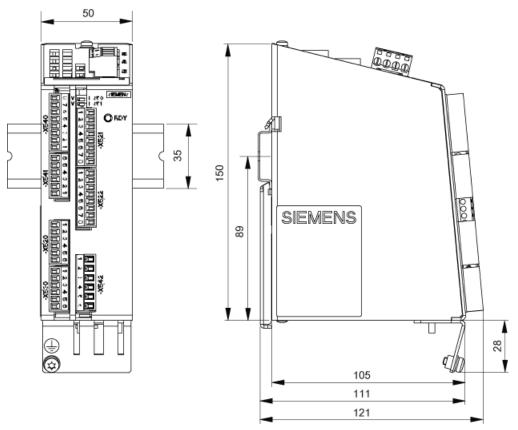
Dimension drawing of the TM31 Terminal Module
